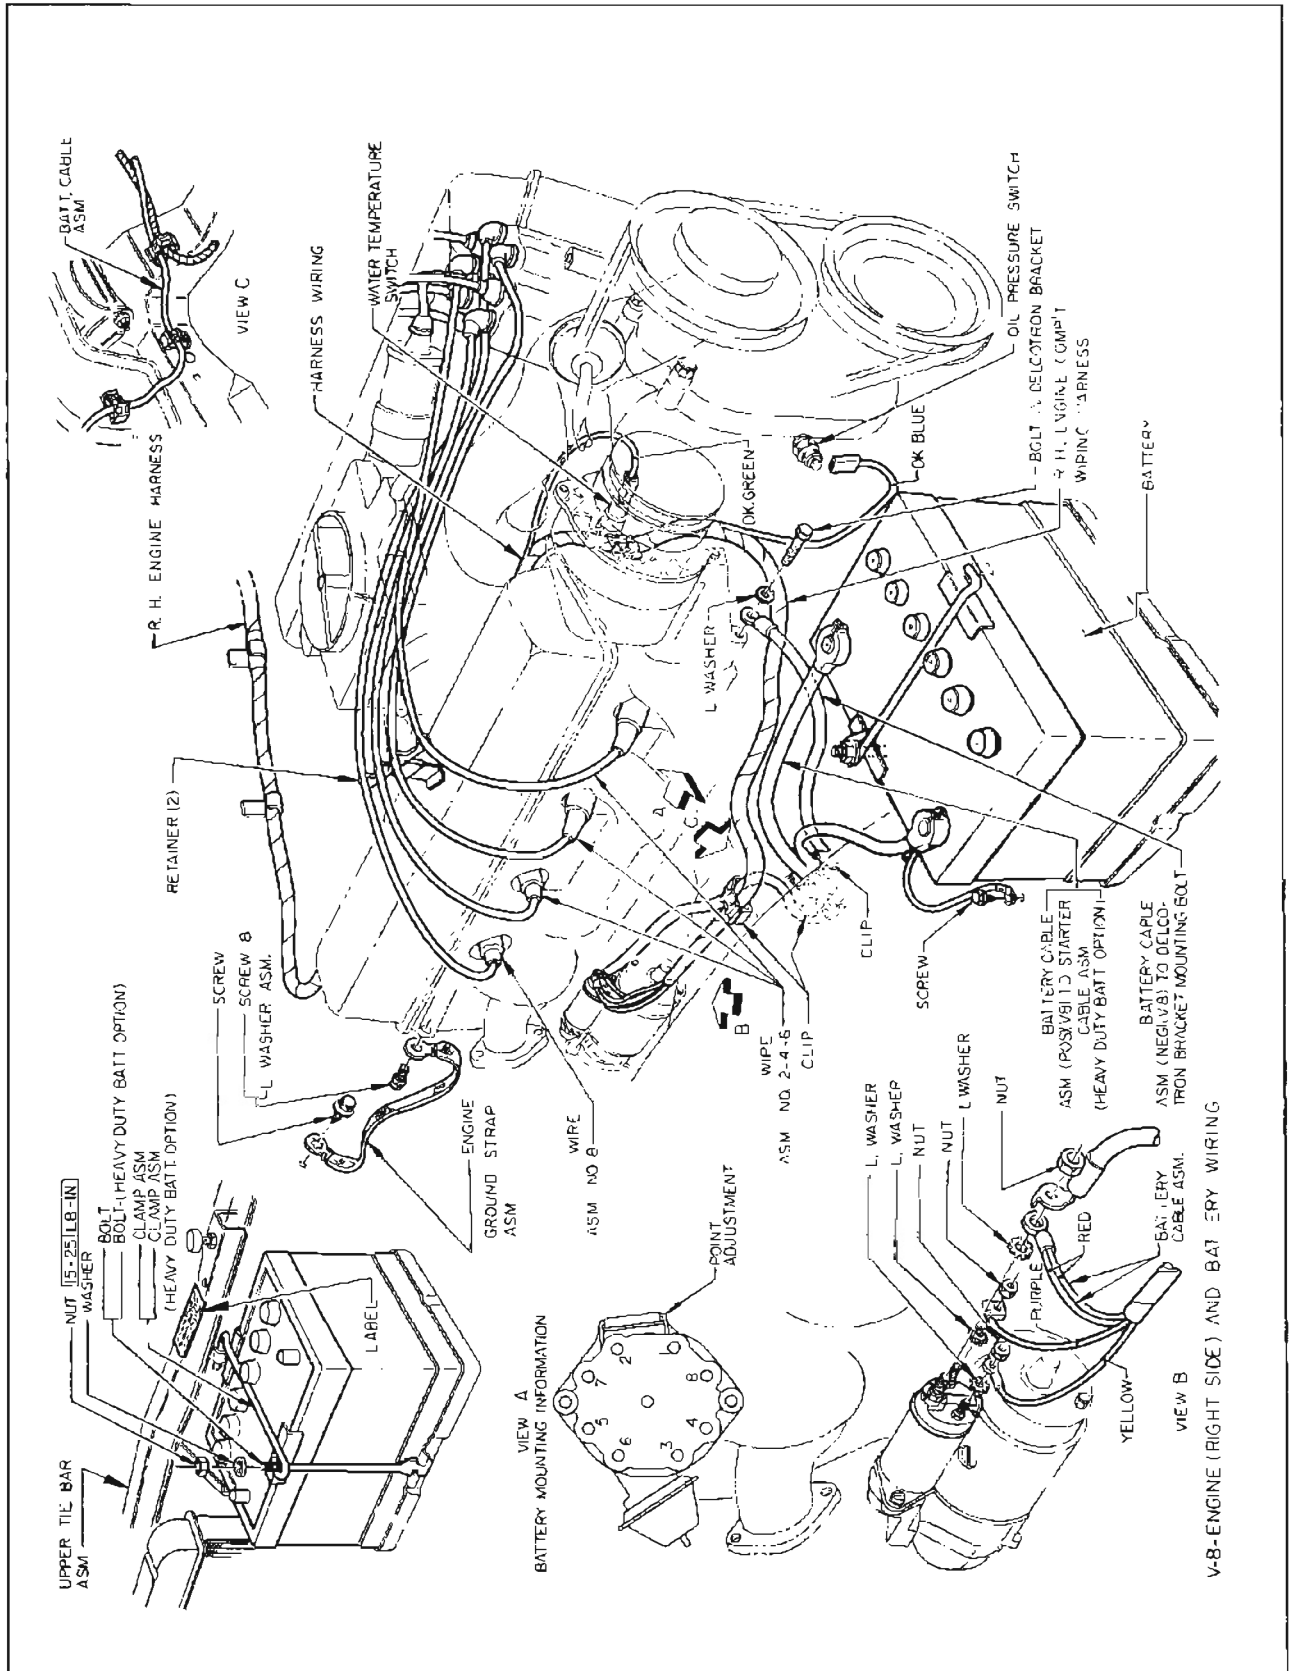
Right Side V-8 Engine Wiring and Battery Wiring
